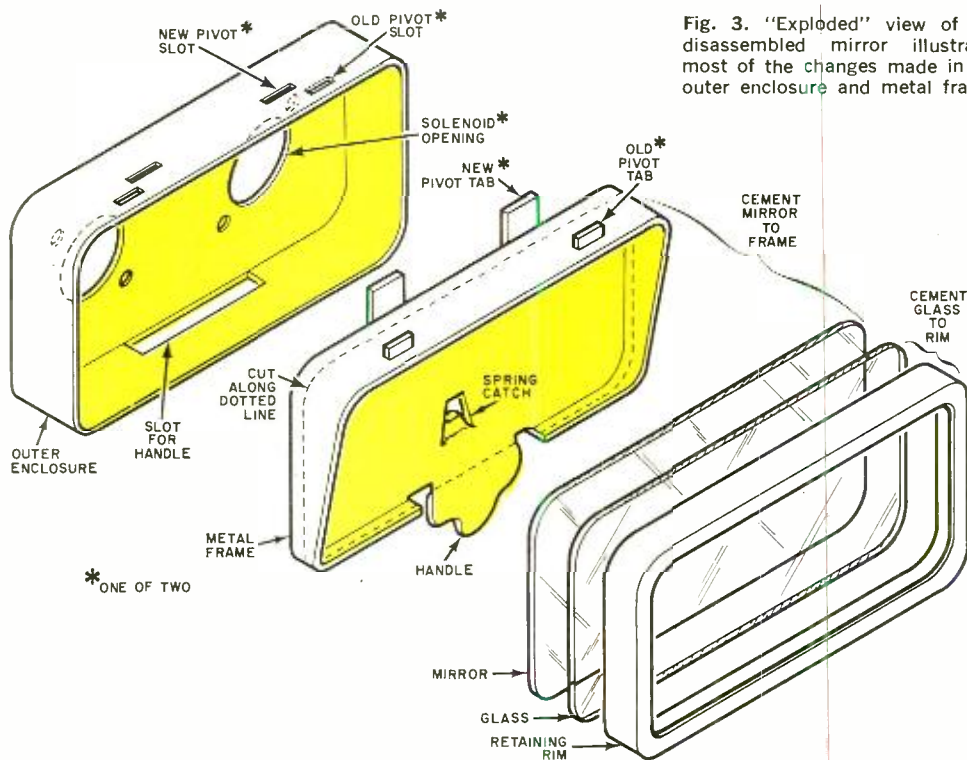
"Exploded" view of the disassembled mirror illustrates most of the changes made in the outer enclosure and metal frame.
